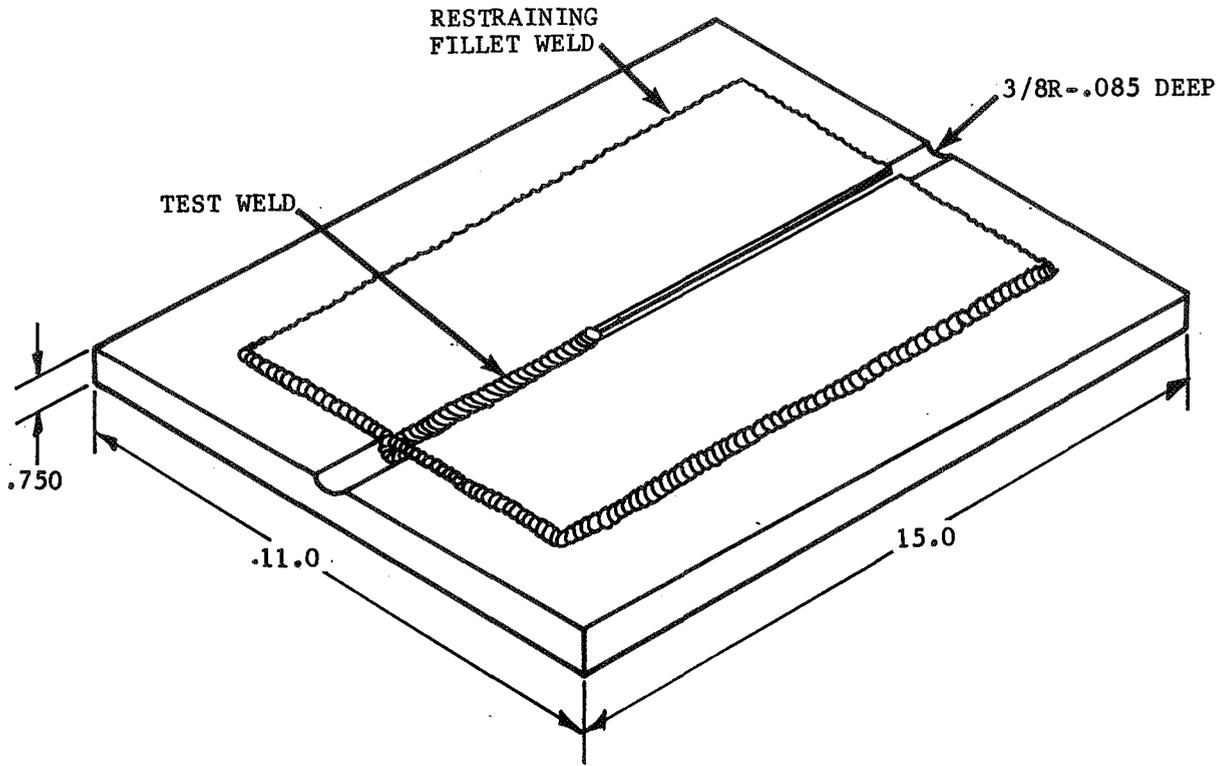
Reeves Restrained Sheet Crack-sensitivity Test Specimen
